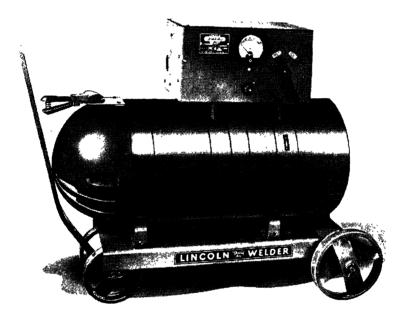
An A.C. arc welding generator (Courtesy of: The Lincoln Electric Company)
